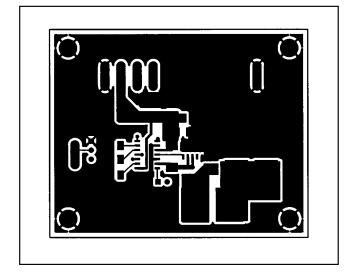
MAX747 EV Kit PC Board Layout—Component Side
